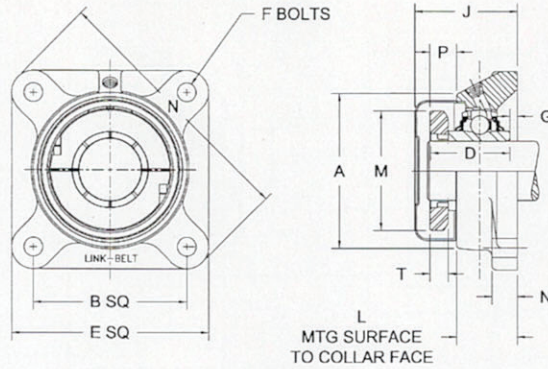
Bolt Ball Bearing Flanged Unit
